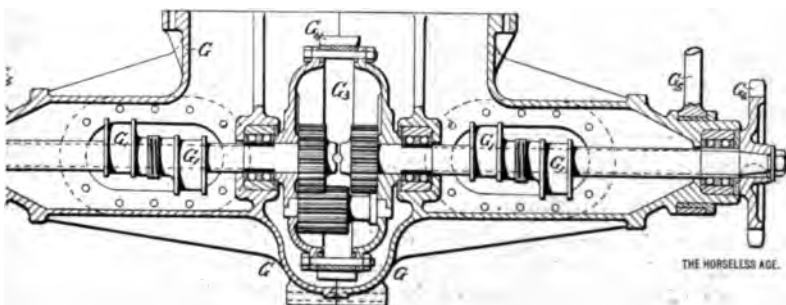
SECTION THROUGH THE COUNTERSHAFT.
